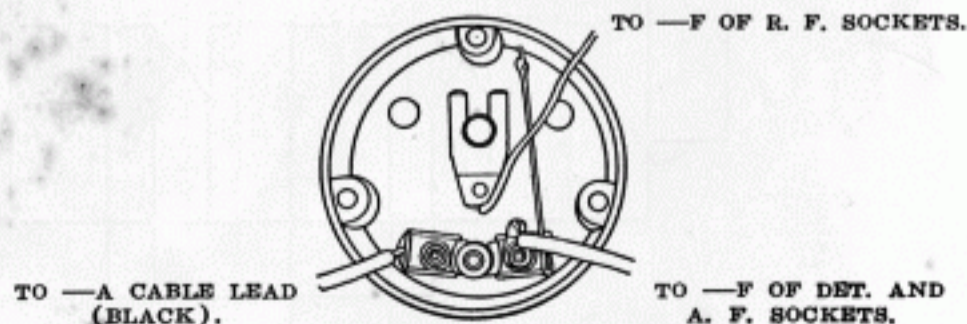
REAR VIEW OF RHEOSTAT AND FILAMENT SWITCH ASSEMBLY USED IN MODEL 35.
